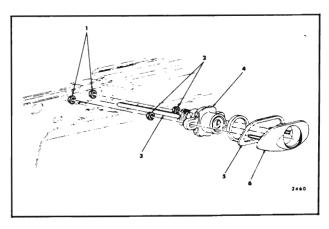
Rear Compartment Lid Lock Cylinder Assembly - Oldsmobile "E" Style Shown
